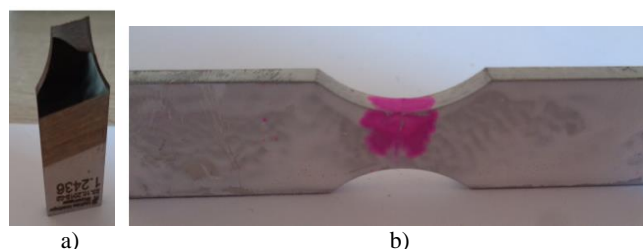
Macroscopic check for the steel with low fracture resistance, respectively high fracture resistance: a) represents the eprouvette made of material x210CrW12; b) represents the eprouvette made of material C15.
